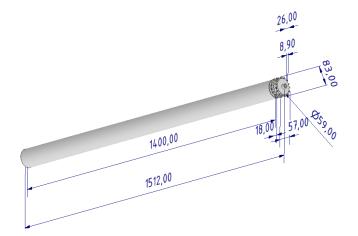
CAD drawing in Autodesk Inventor of the heavy-duty conveyor roller Series 3600 from Interroll. Dimensions in mm.
